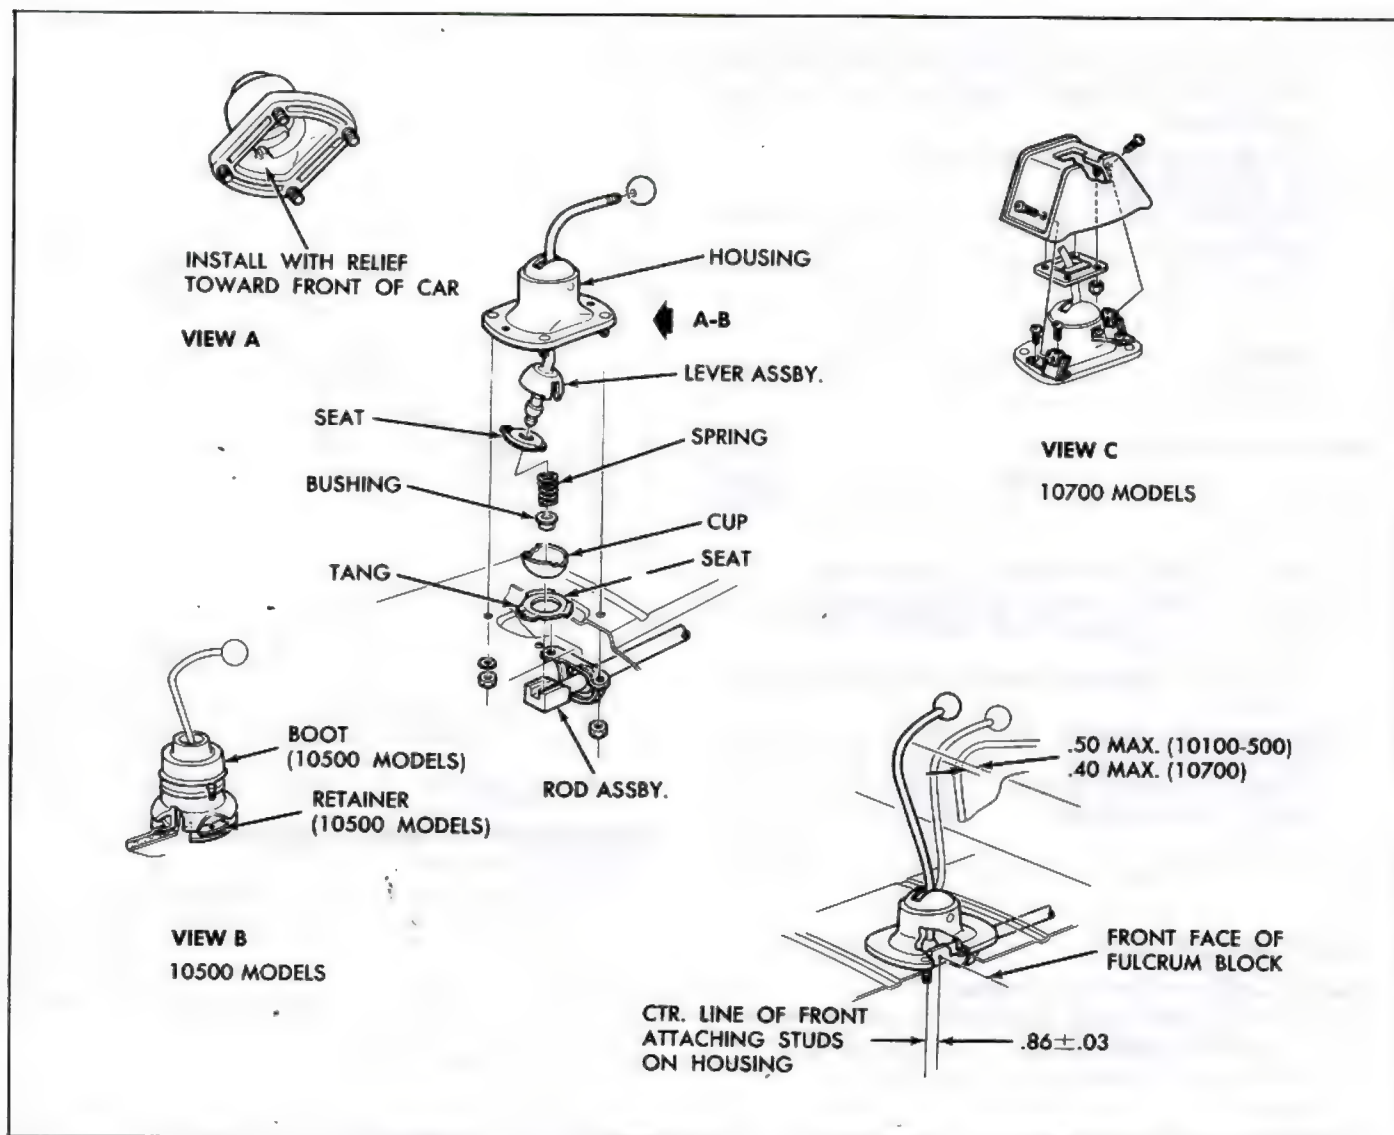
A-2—Gearshift Lever Assembly—Exploded View
